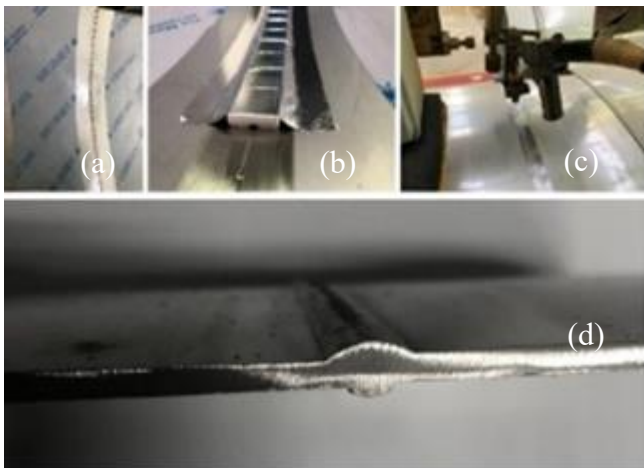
Welding process of Stainless steels; (a) centring, (b) placing of ceramic pad (c) position of welding torch and (d) welded plates.
